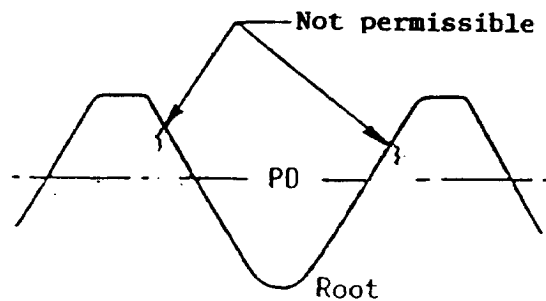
Laps Above PD Extending Toward Root, Rolled Thread
